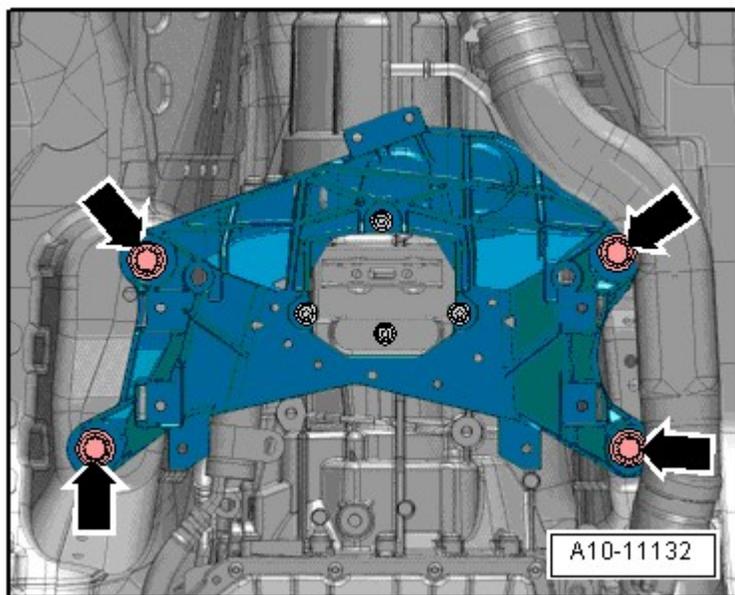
Identifying Subframe Bolts (Tighten To Specifications)
